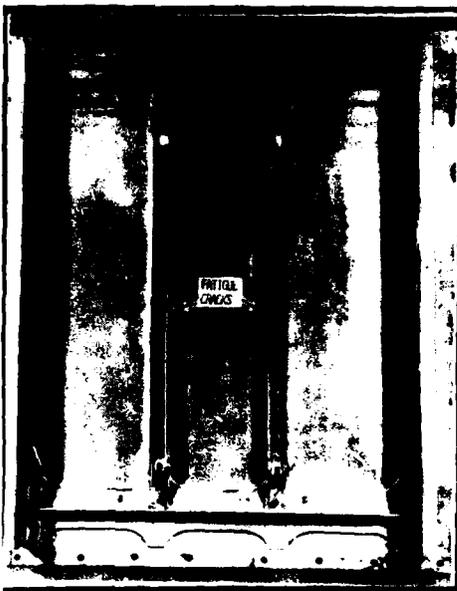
INTERMEDIATE SEGMENT FAILURES, BONDED ACOUSTIC TEST PANEL, FM-173 ADHESIVE BR-127 PRIMER, METAL BOND ETCH SURFACE PREPARATION
